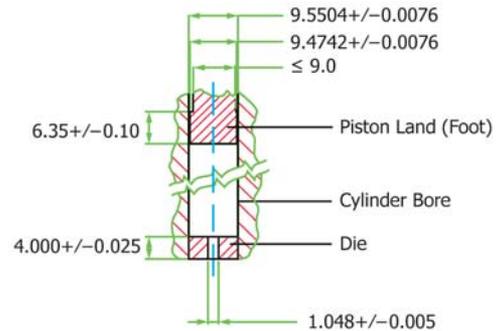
Dimensions of the cylinder bore, piston foot & "half" die
